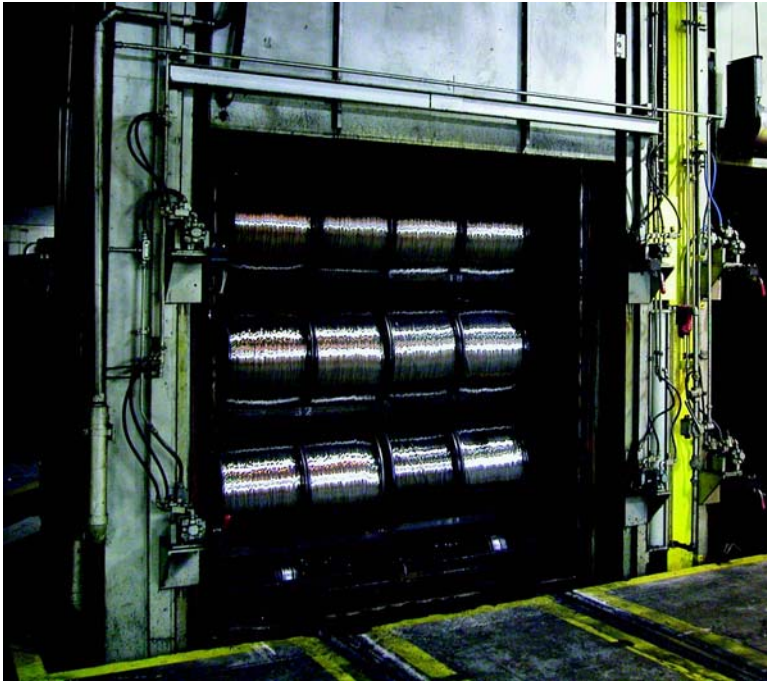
These 600 Pound Spools of Aluminum Welding Wire are About to Undergo an Annealing Operation to Remove the Work Hardening Affect Produced by Previous Wire Drawing Operations
